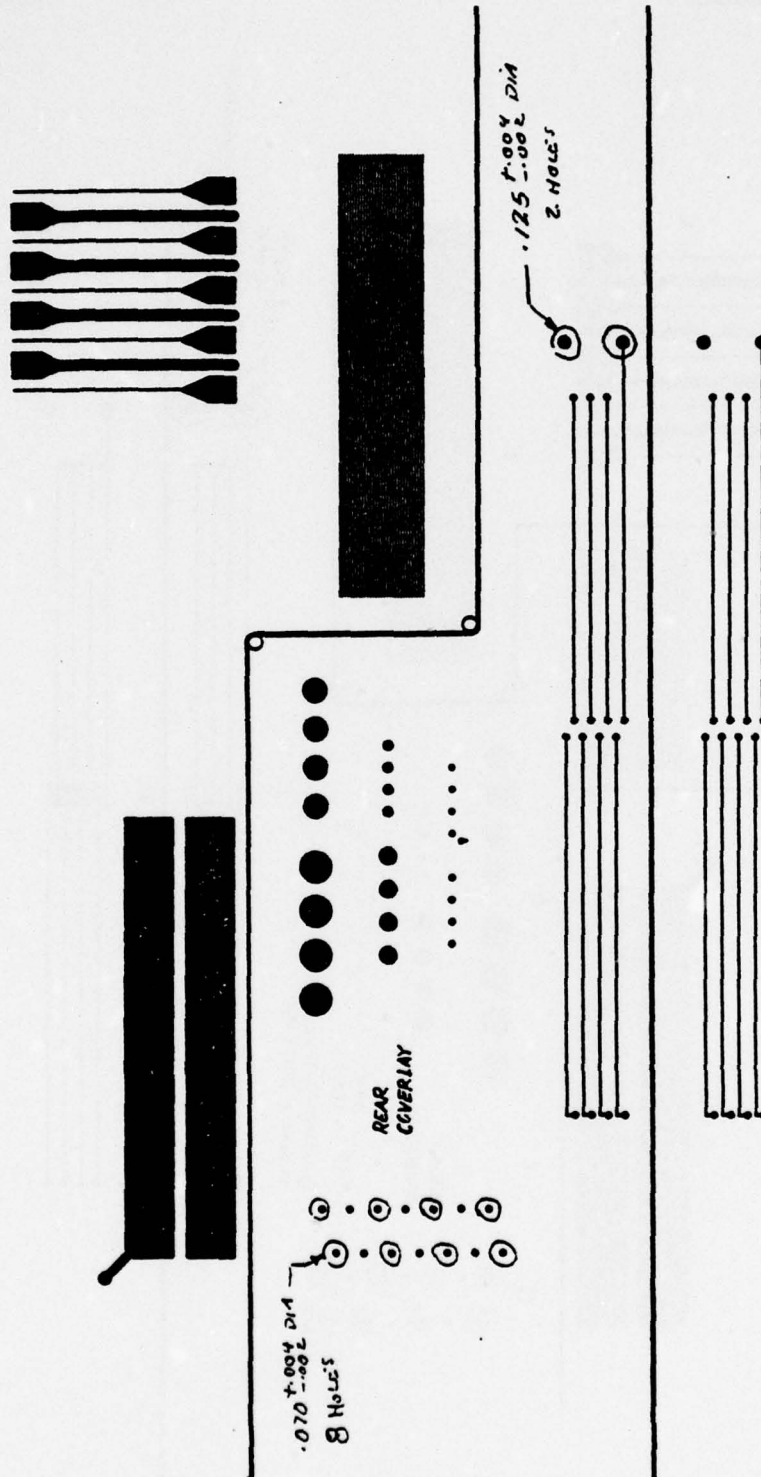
Two Layer Flexible Printed Wiring Test Pattern (REAR)
